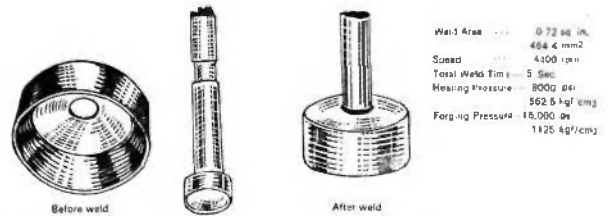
Transmission input shaft SAE 1310 to SAE 1141
